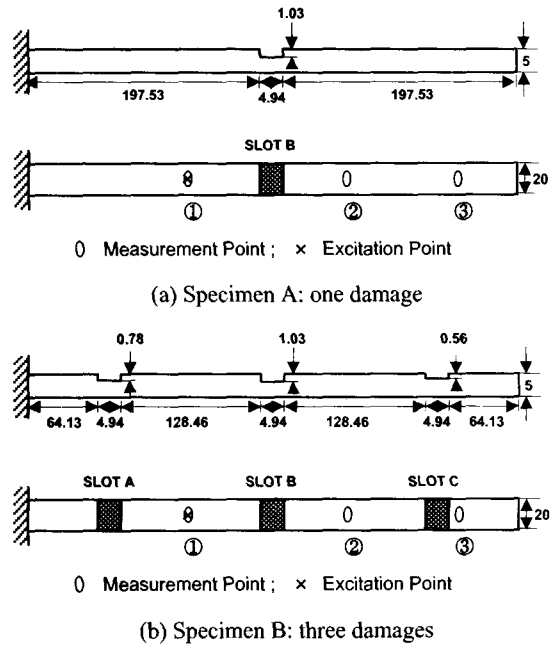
Geometries of the two damaged beam specimens (units: mm)
